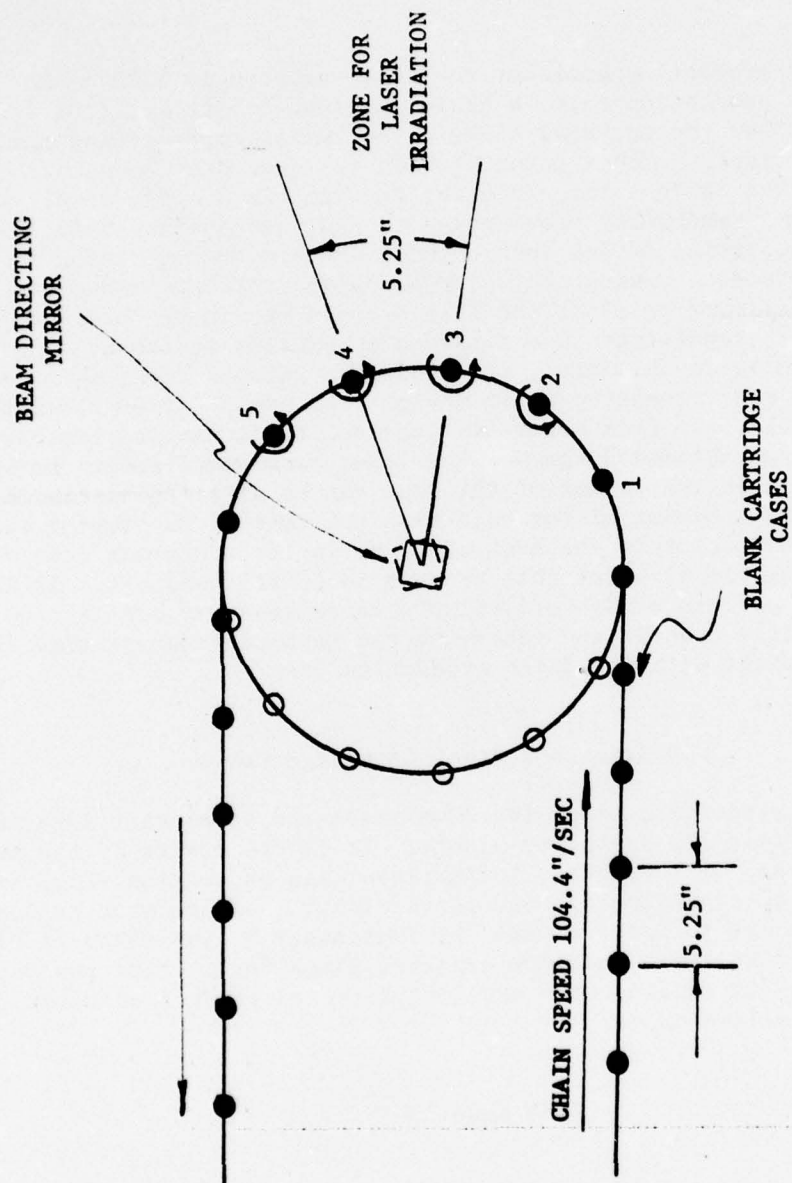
Schematic Drawing Showing Zone in Which Laser Annealing Can Occur.
